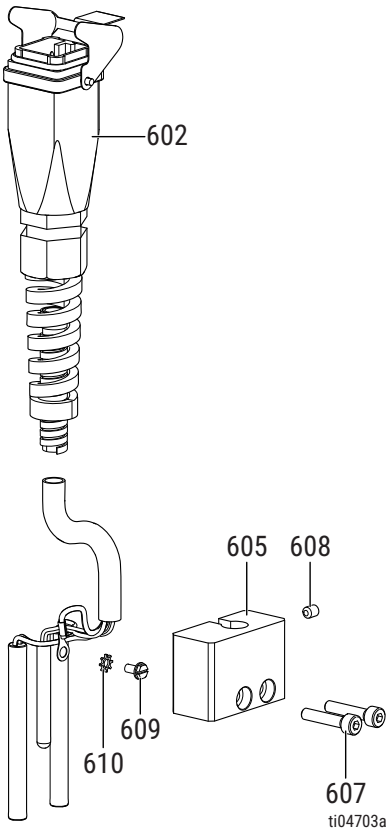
Heater Assembly (for 60 mm Outlet Block)
